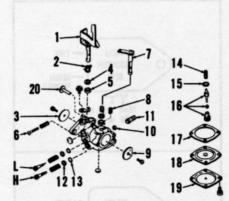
Exploded view of typical Tecumseh diaphragm type carburetor. Some models do not
